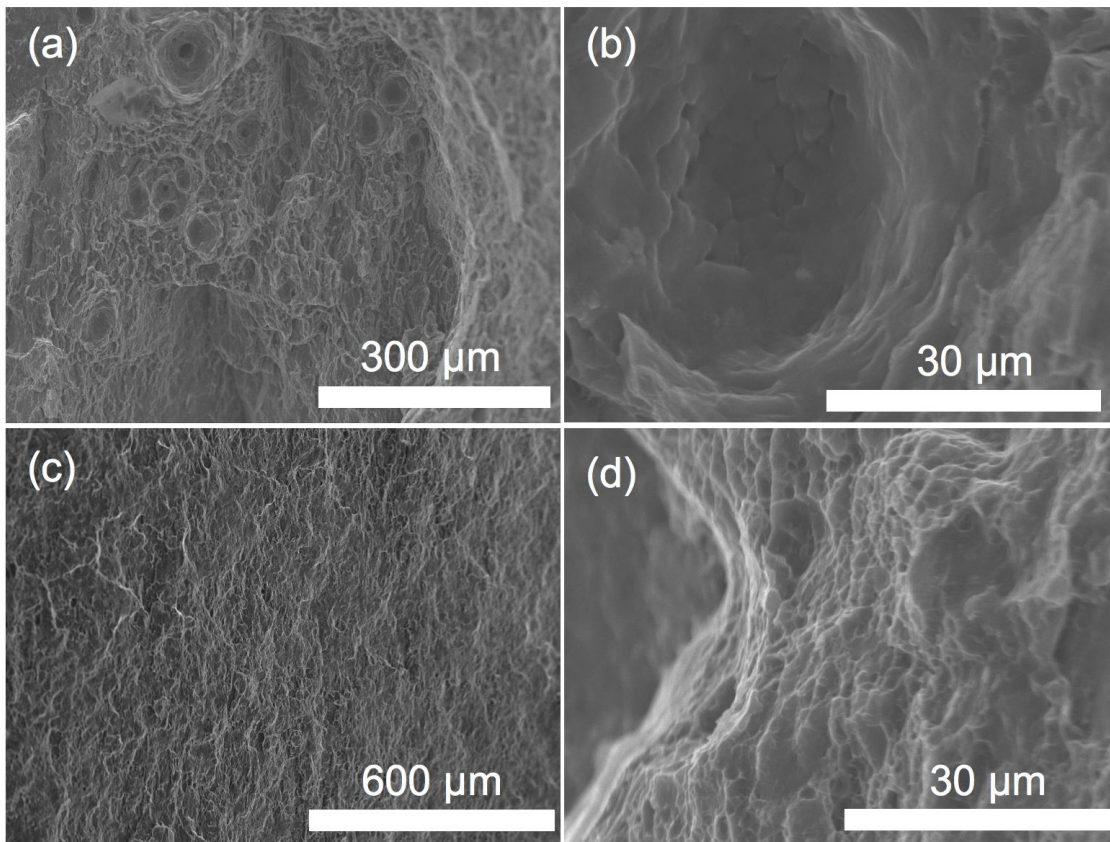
Tensile fractographies of AZ31 LBW butt welds: (a), (b) ductile pattern and (c), (d) partly brittle pattern.
